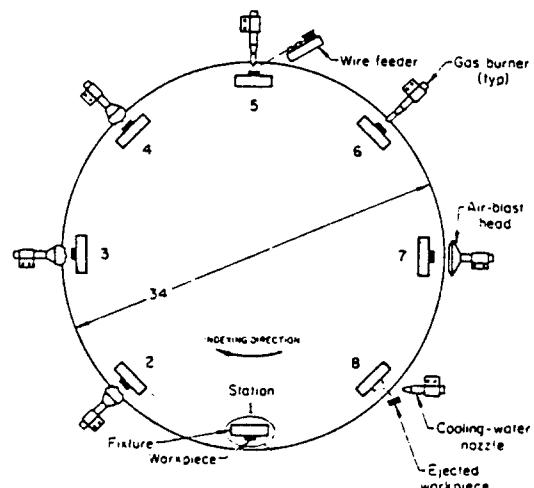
Schematic diagram of assembly and turntable machine for automatic torch brazing
